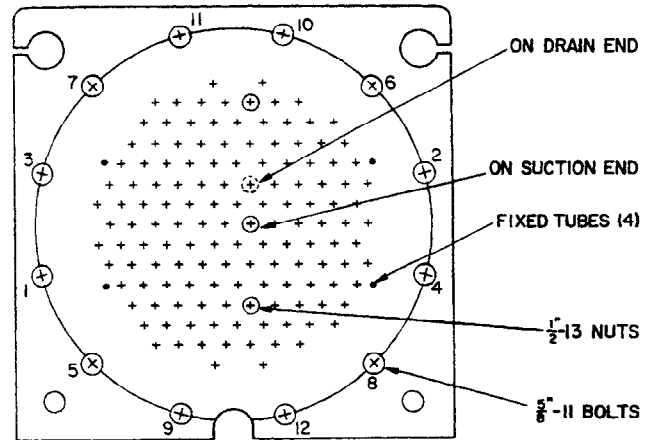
Head Bolt Tightening Sequence (30GTN, HK, HL)
